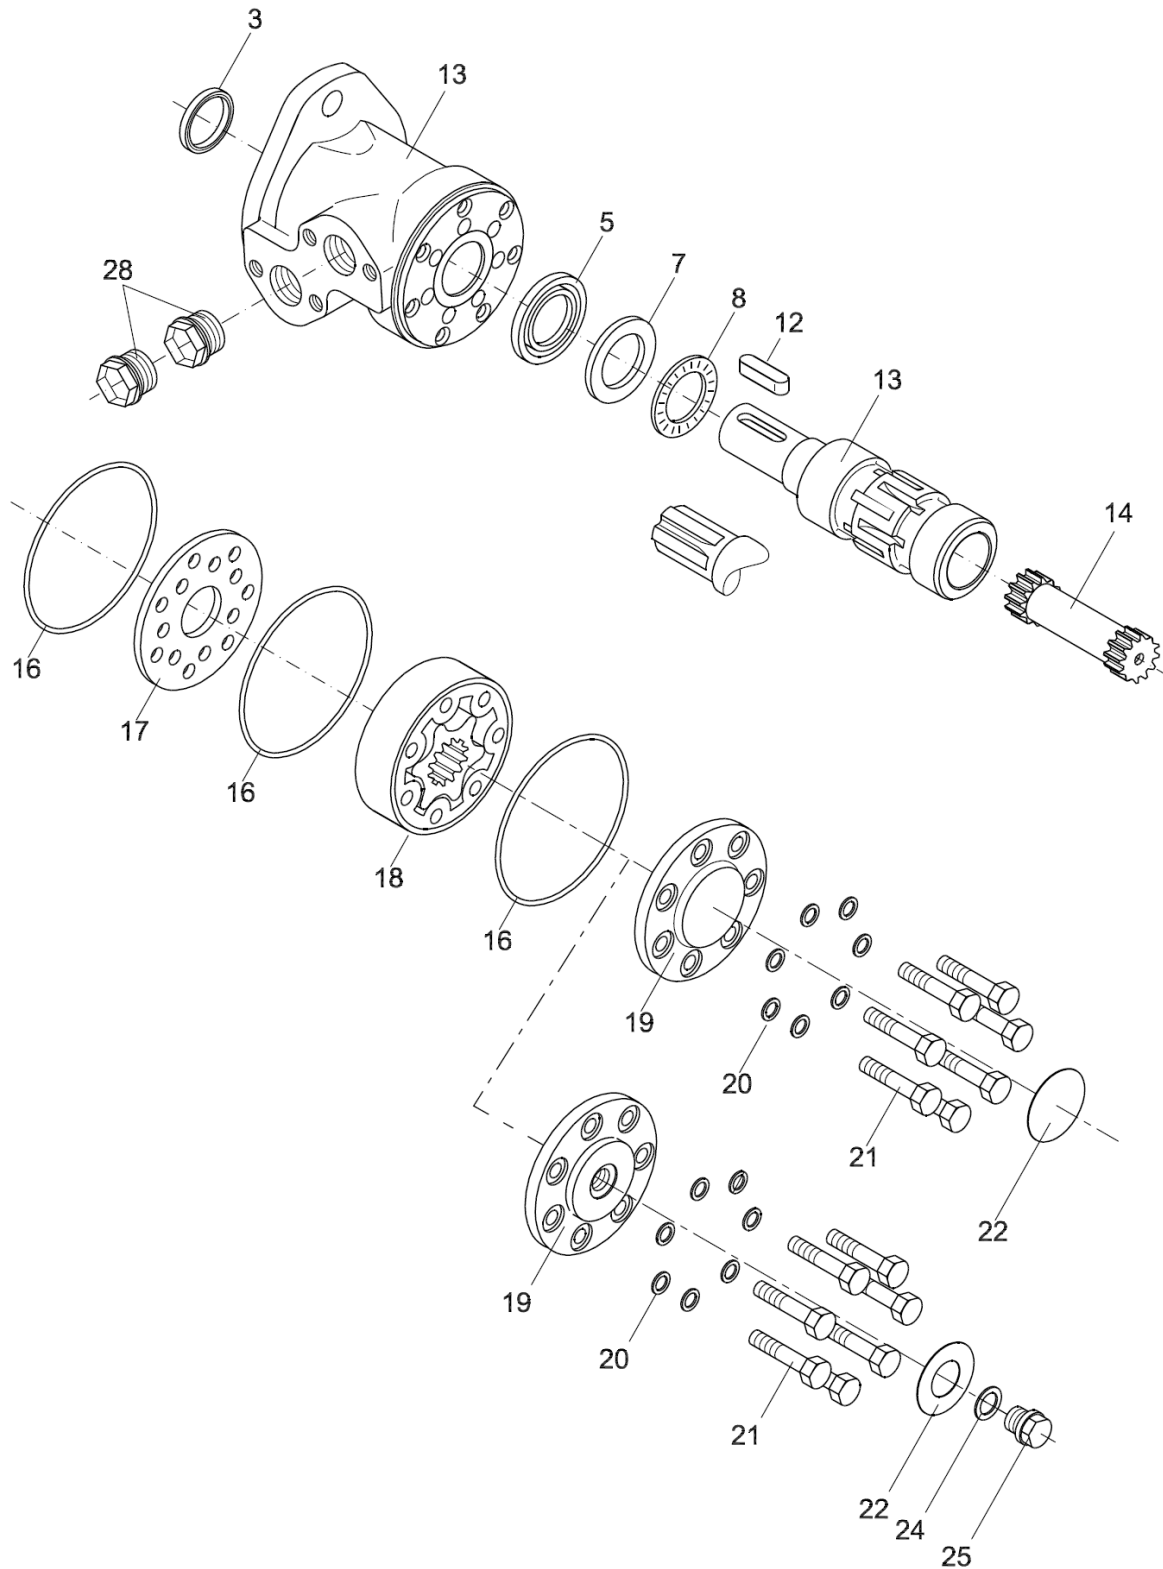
OMP Metric version, Series 8 with Integrated Spigot Flange Exploded view
